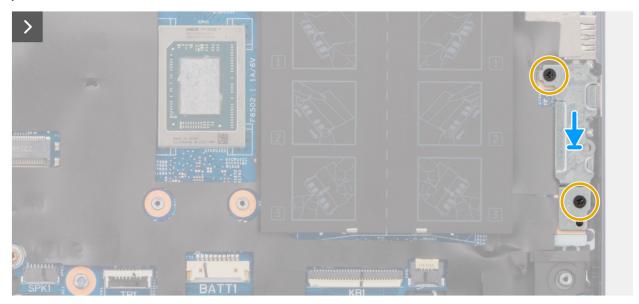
Installing the system board (for computers shipped with an aluminum chassis)
